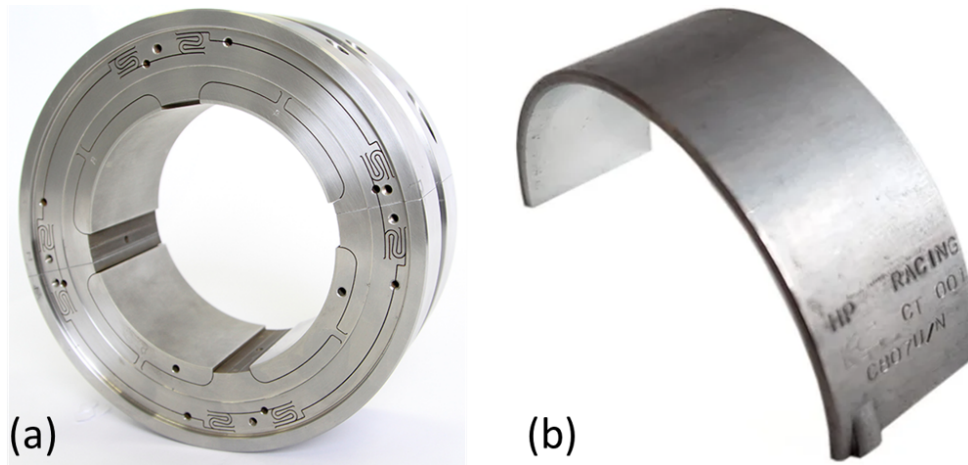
(a) Photograph of a typical tilting pad journal bearing [61]. (b) Photograph of a typical big end bearing [62].
